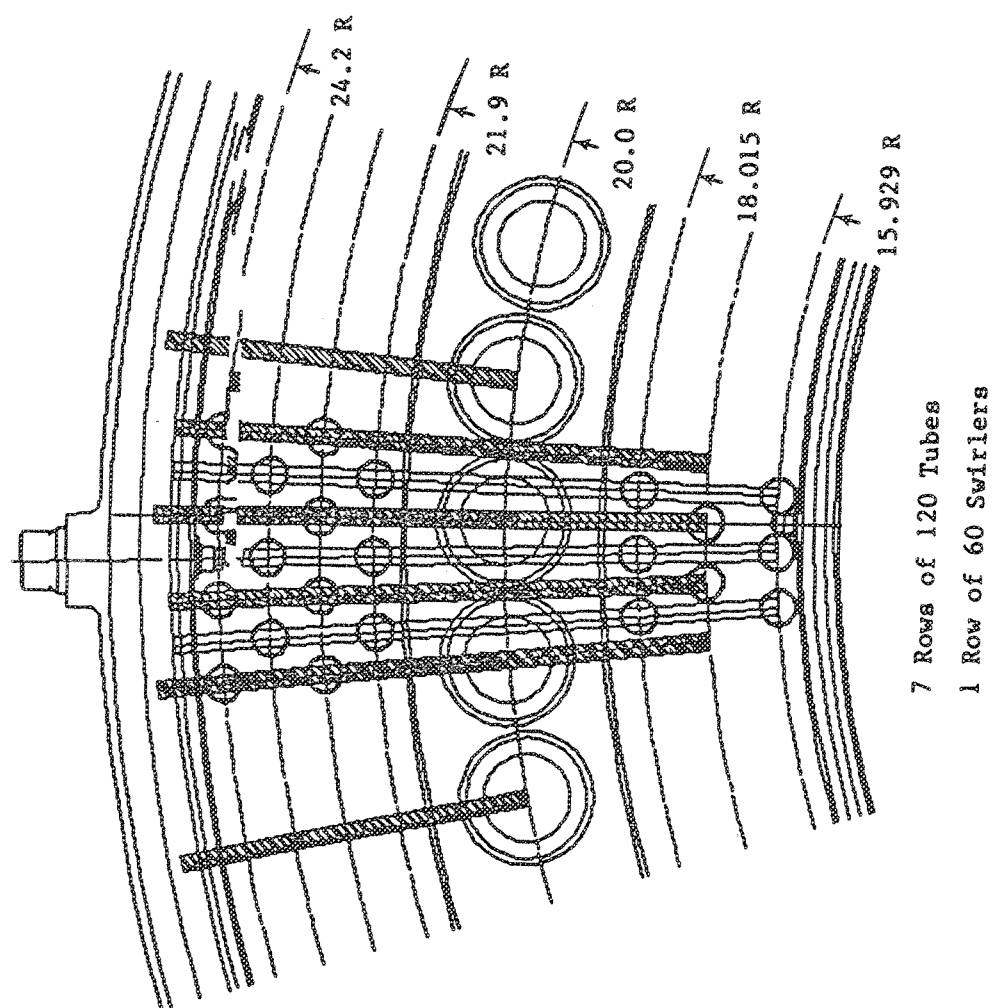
Mechanical Design Layout for the IMFH Combustor (End View FLA).
